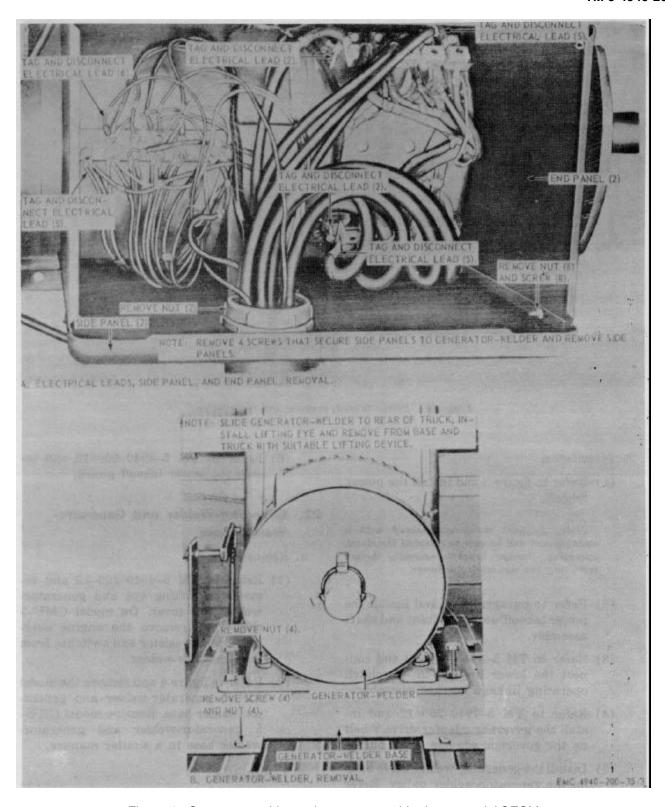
Generator-welder and generator-welder base, model SECM, removal and installation.
